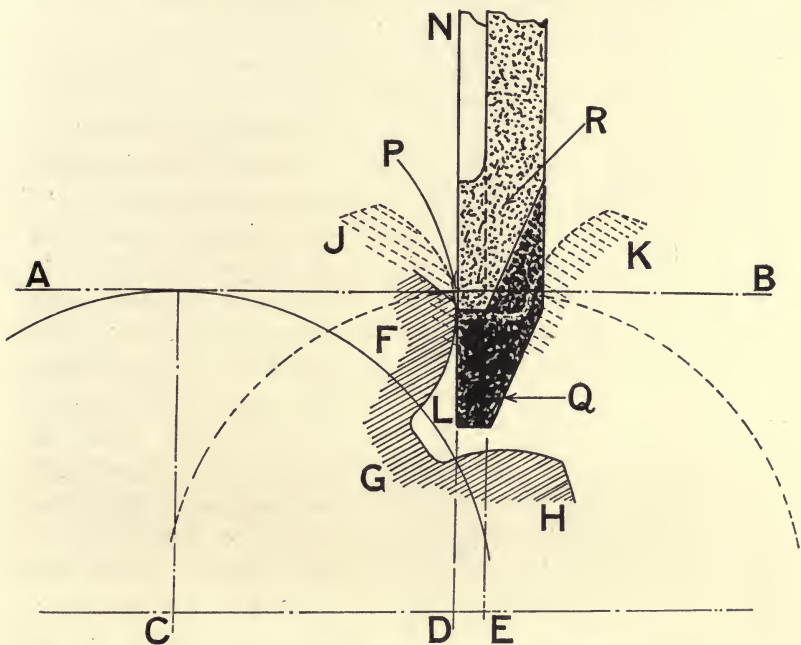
GRINDING GEAR TEETH. GENERATING PRINCIPLE
